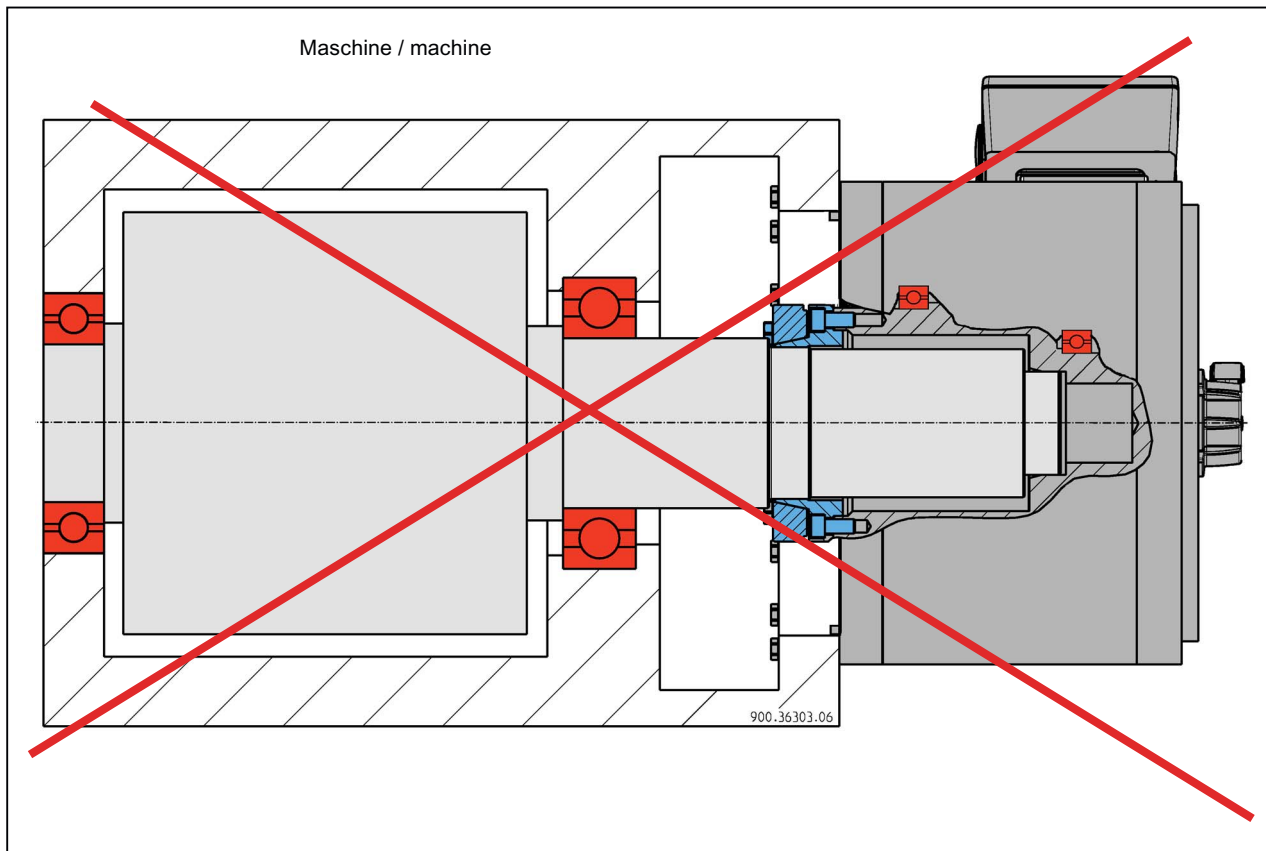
Over-determined bearings of a shaft (to be avoided)
